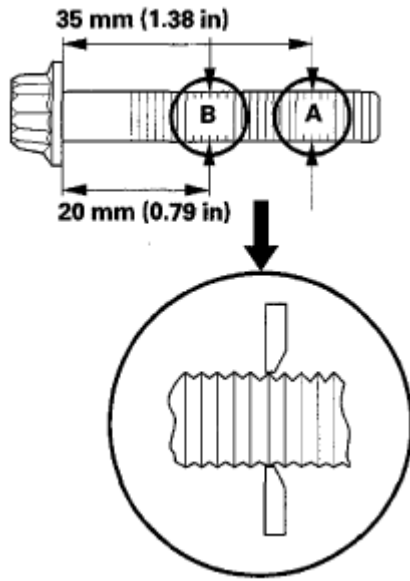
Measuring Diameter Of Connecting Rod Bolt
